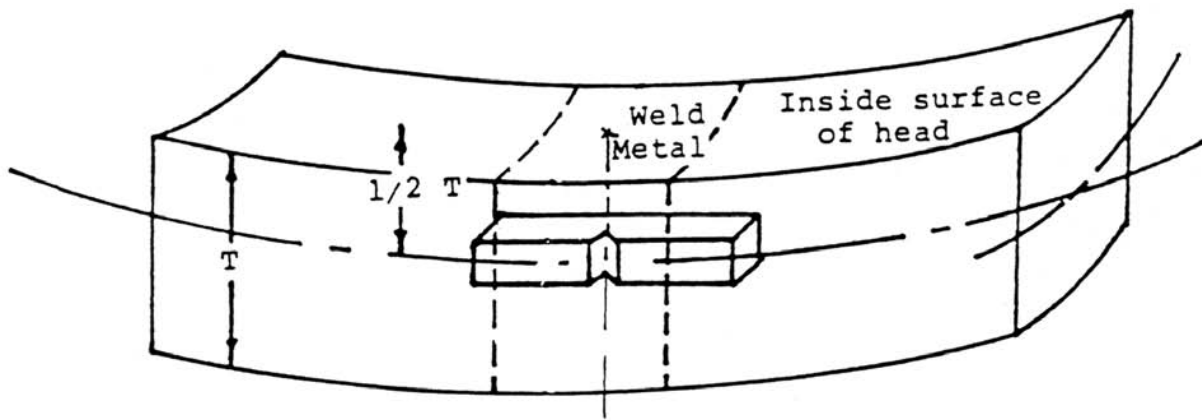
Location and Orientation of Weld Metal Charpy and Dynamic Tear Impact Specimens on Two-Piece Heads.
